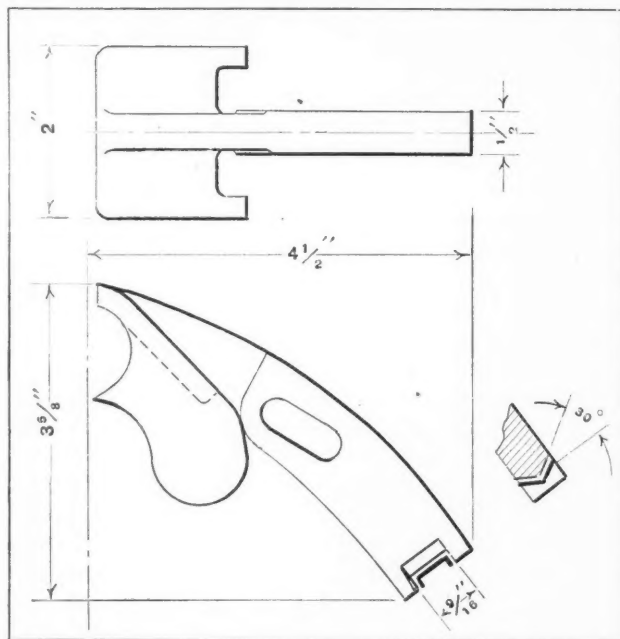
Outline of the Brake-shoe Adjuster Milled in the Machine Shown in Fig. 1
